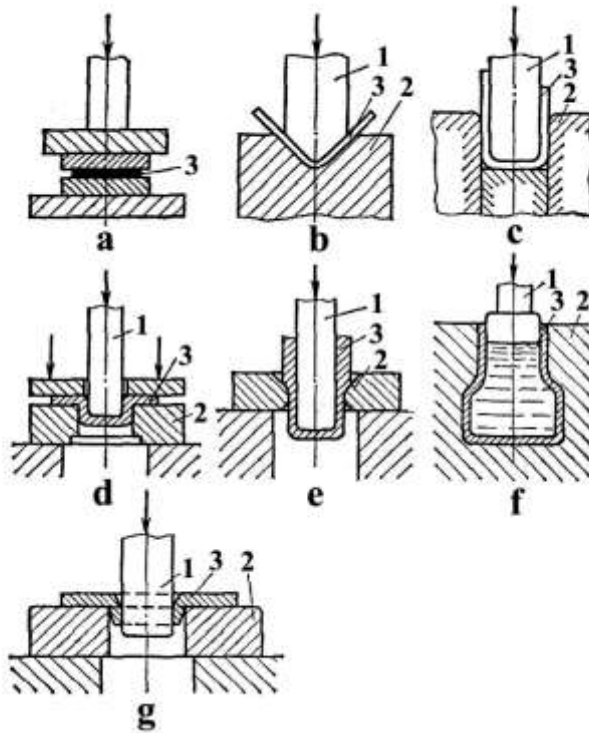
Forming operations of sheet stamping: a-straightening; b-bending; c, d, e-draw-forming, f-spread forming, g-flanging; 1 – upper die (punch); 2 – lower die; 3 – billet.
